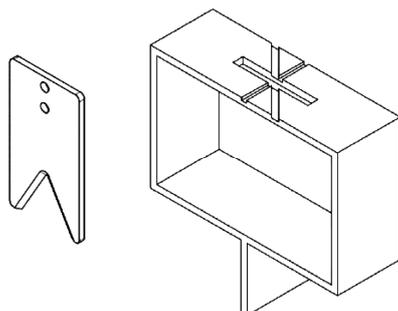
Cutting blades device and a view of fixture that used for fixing samples
